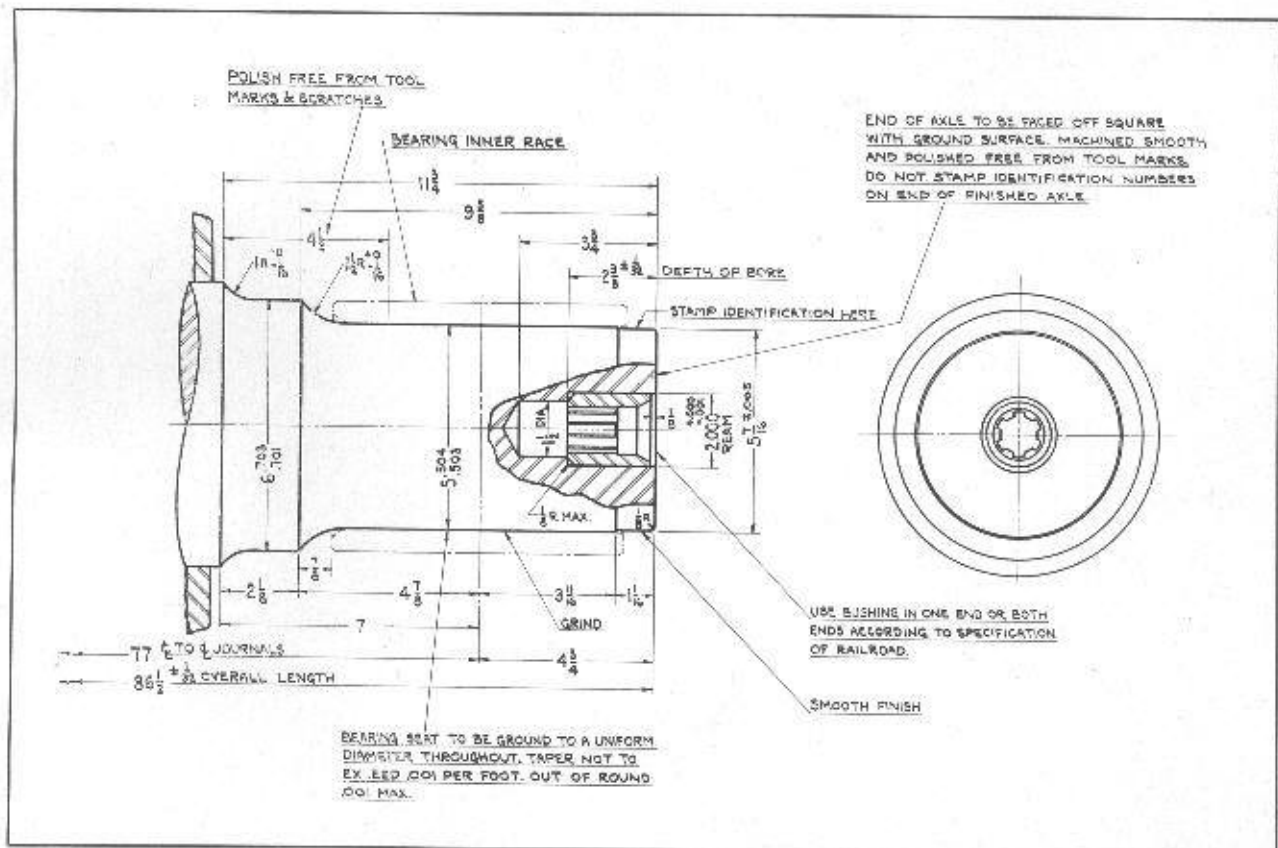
Representative axle detail drawing, for the type JM Journal Box, with the splined bushing in place.
